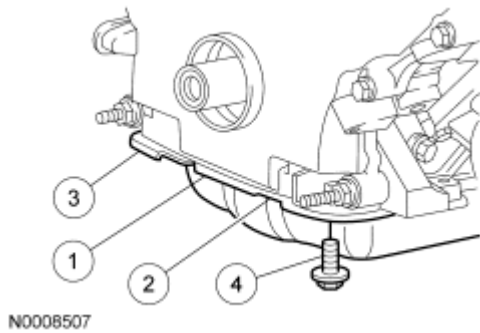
Identifying Tightening Sequence Of Front Oil Pan Bolts
